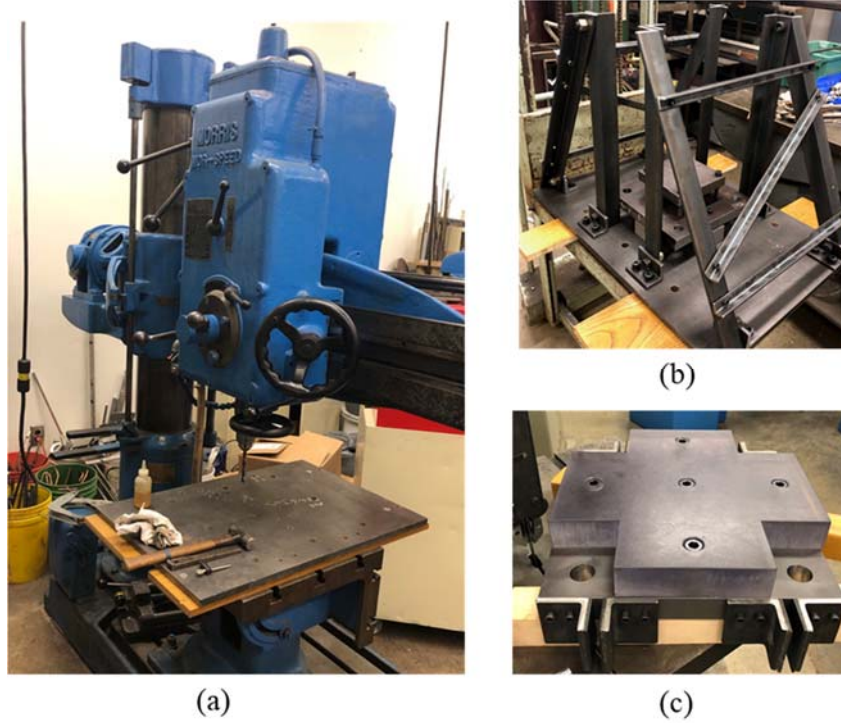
(a) Fabrication of the steel plates, (b) assembled truss frame and (c) front impact plate
